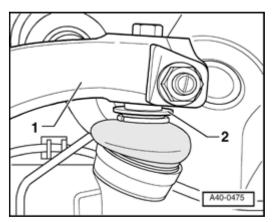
Identifying Steering Arm & Tie Rod Ball Joint Sealing Washer Courtesy of VOLKSWAGEN UNITED STATES, INC.
